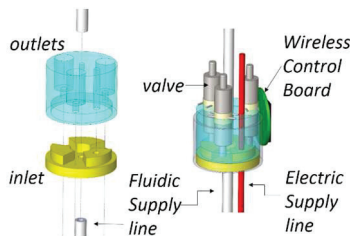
Left: exploded view of the two connector's halves. Right: actuation unit assembly.
